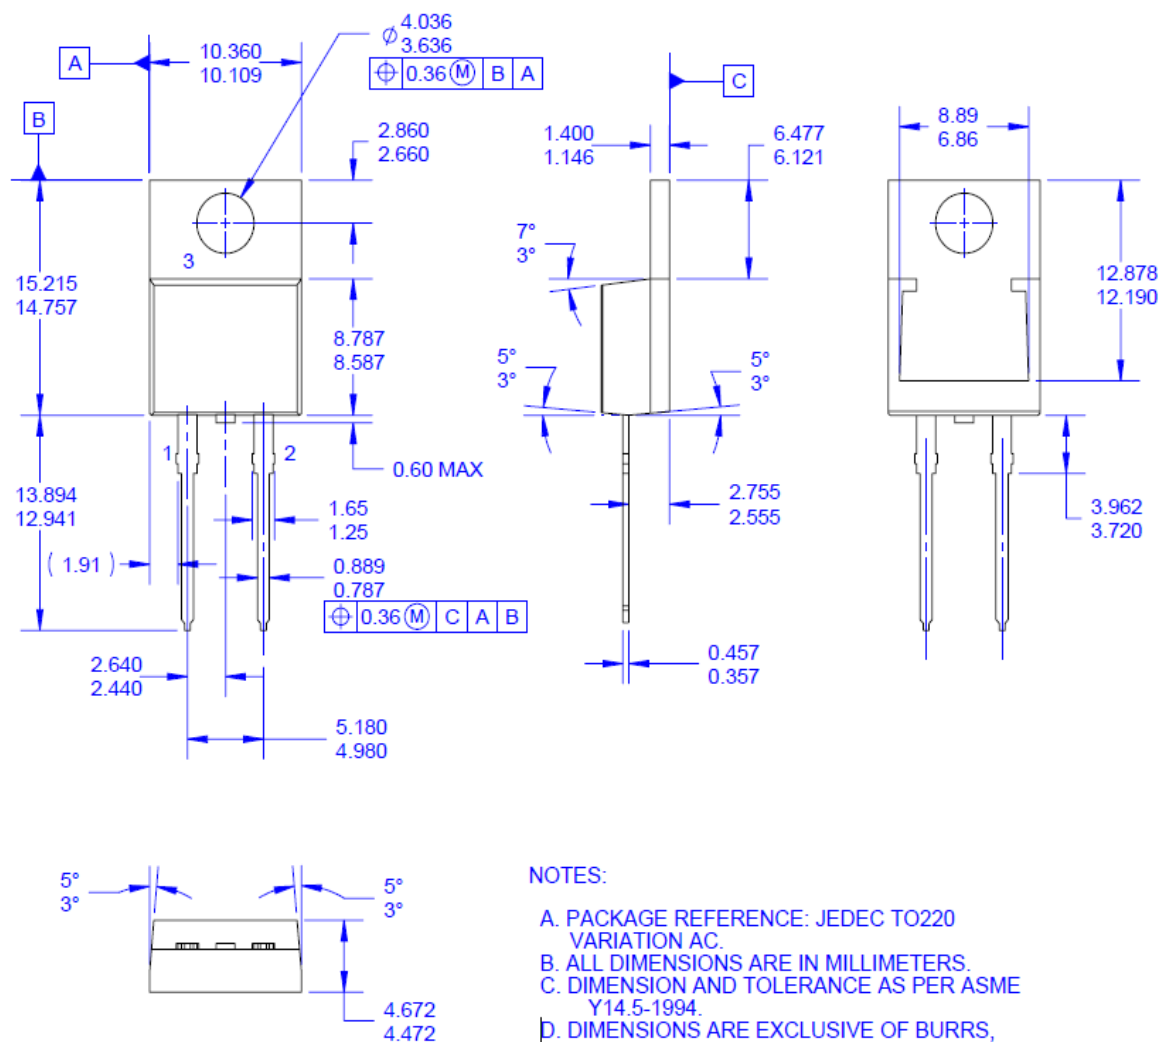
TO-220 2L - TO-220, MOLDED, 2LD
